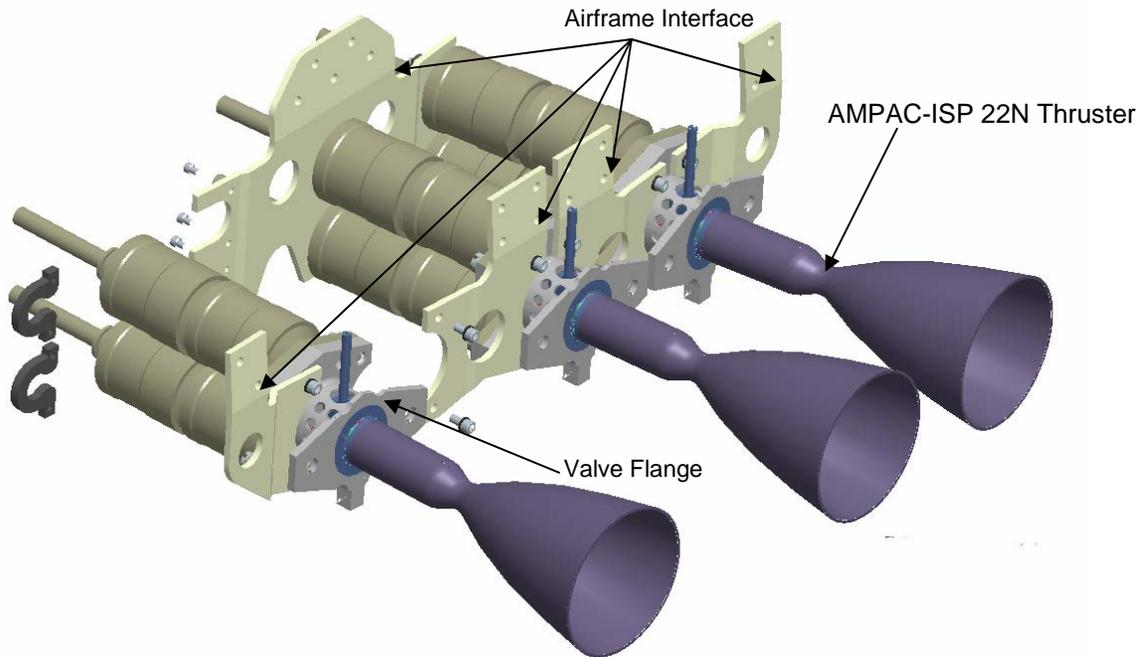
Triple 22N In-Line Thruster Mounting and Assembly
